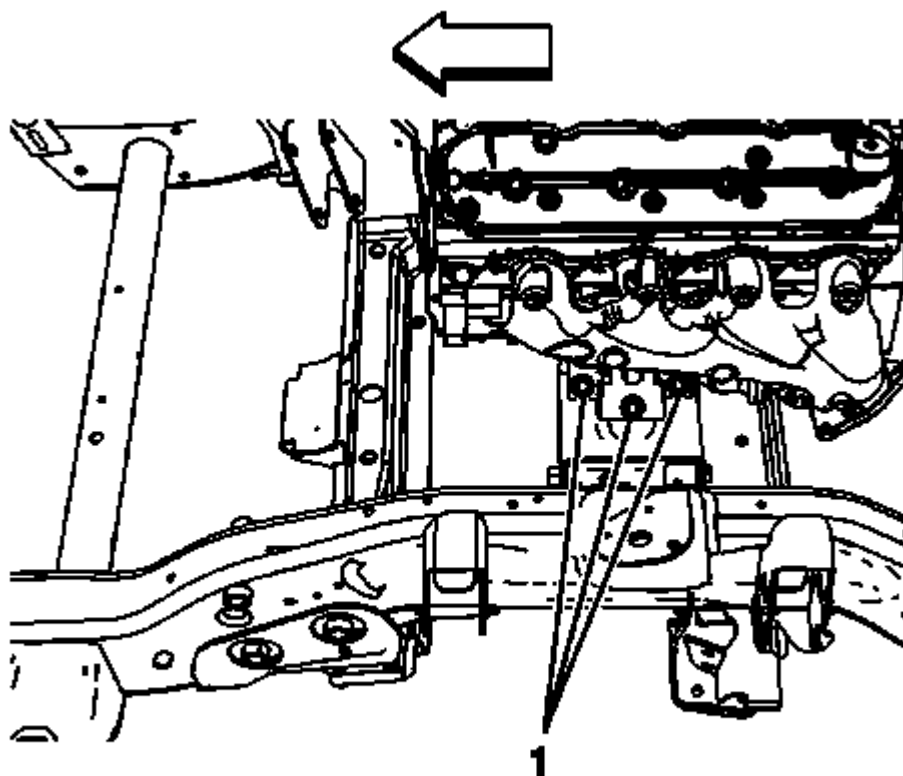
View Of Engine Mount To Frame Bolts
